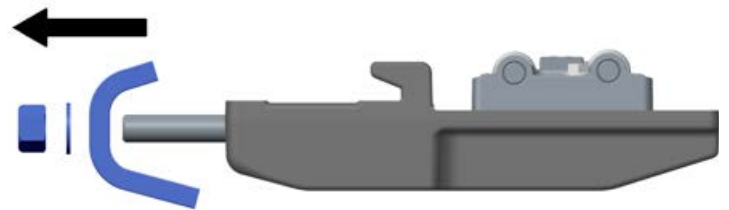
Preparation of the ARV; disassembly of clamping piece
